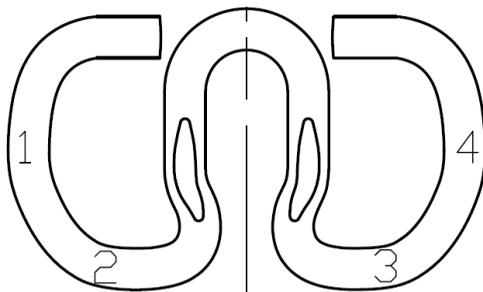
Marking of places for measuring the wire diameter of flexible clamps
